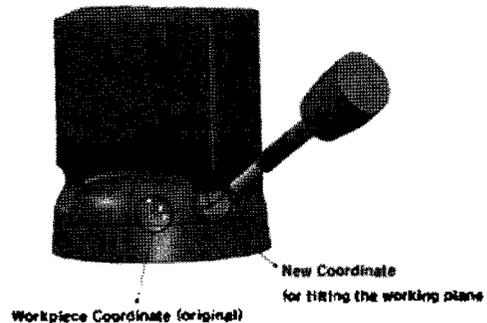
Setting local coordinate frame for positional 5-axis machining.
